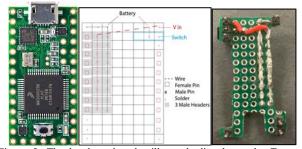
The breakout board will attach directly to the Teensy 3.2 microcontroller (leftmost picture). Before creating the physical breakout board (rightmost), a plan was cultivated using Adobe illustrator.
